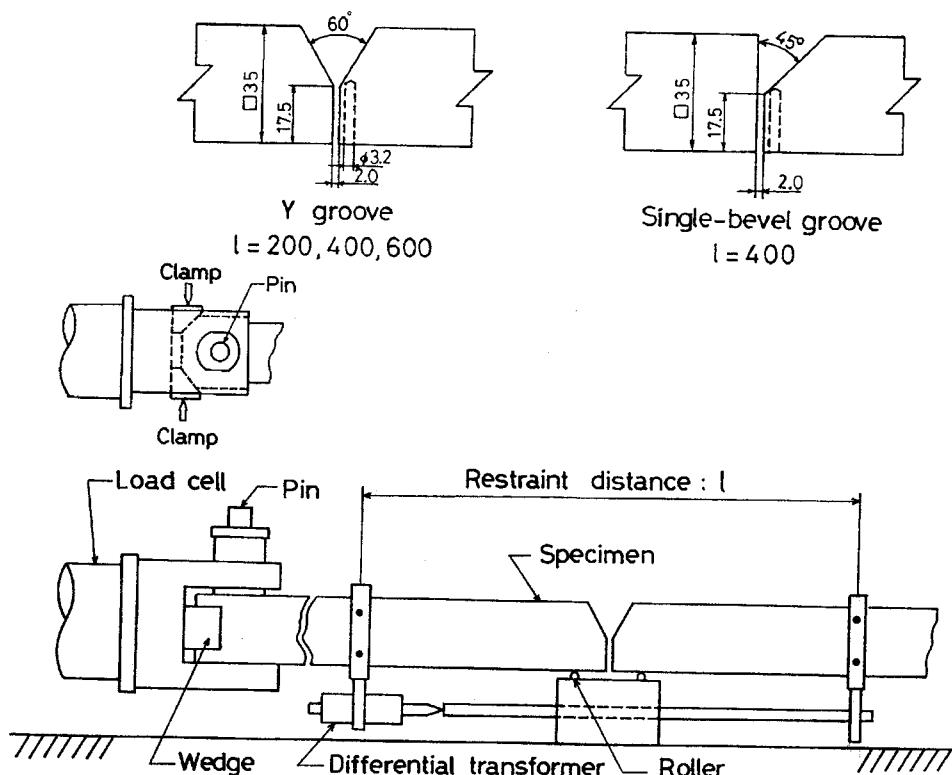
Setup of specimens for RRC test and detail of grooves
